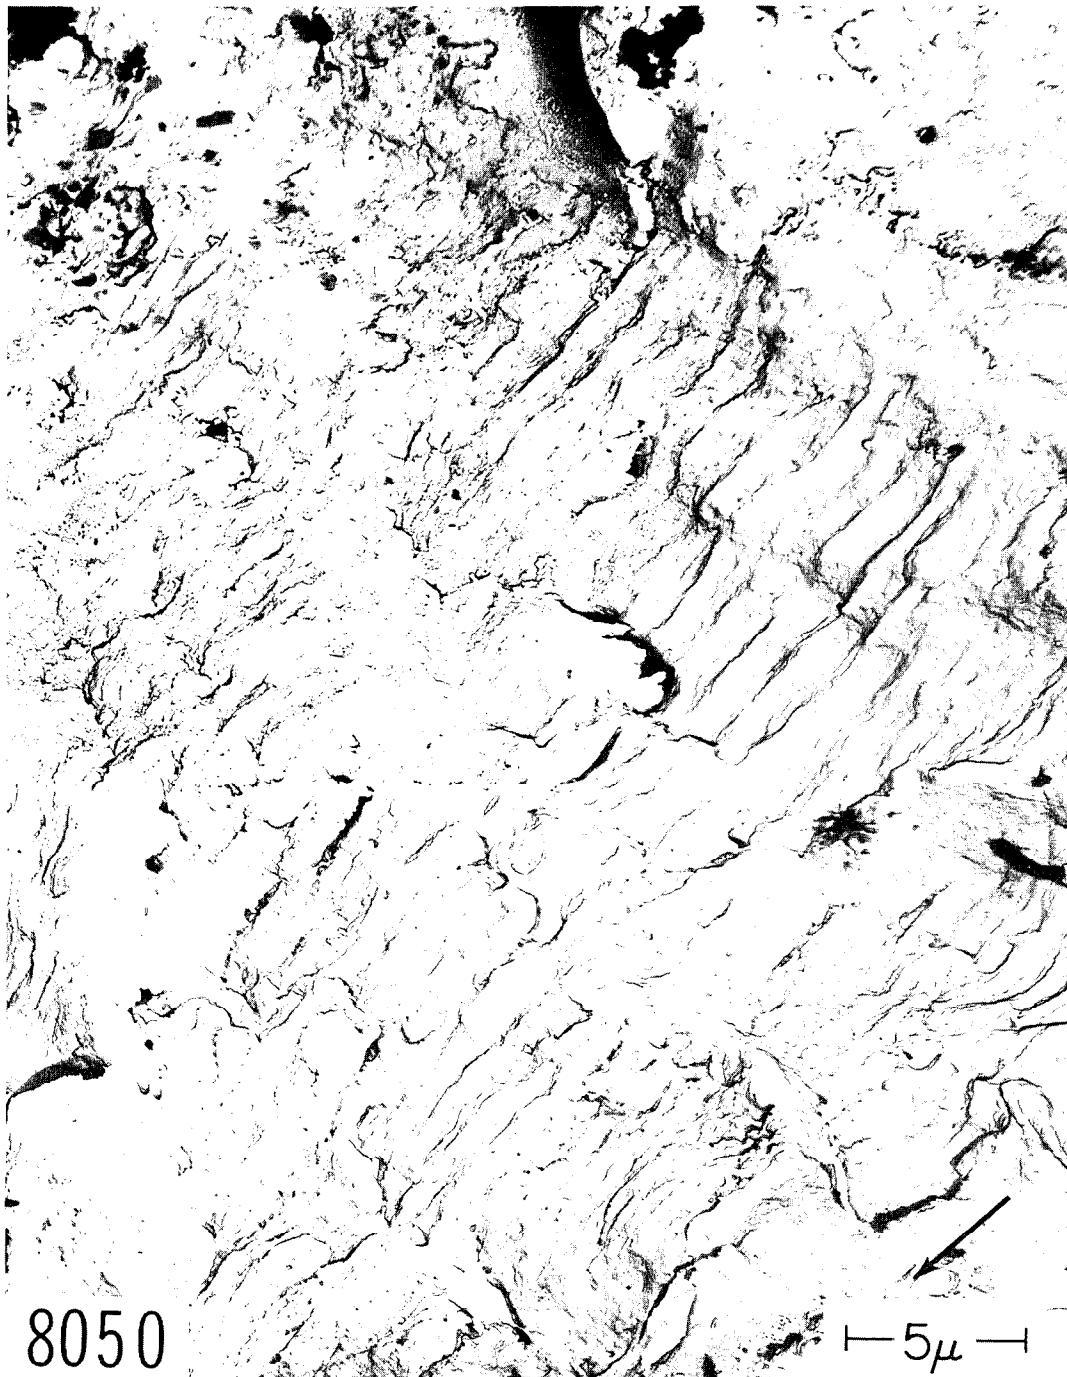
Fatigue striations in the fatigue crack shown in the HY 80 specimen in Fig. 90. Cellulose acetate-carbon replication technique. Palladium shadowed. 6000X.
